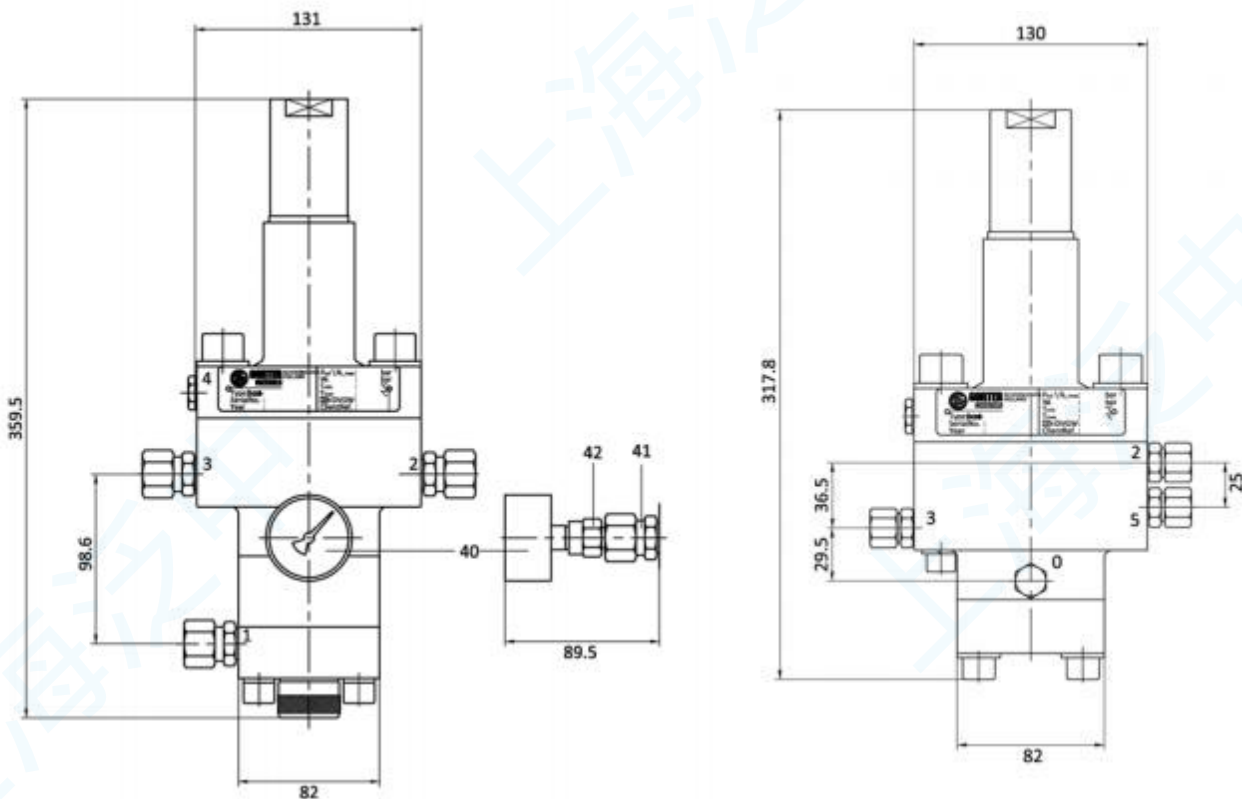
dimensional drawing P095 xPS-1500# and AP095-xP-1500#
